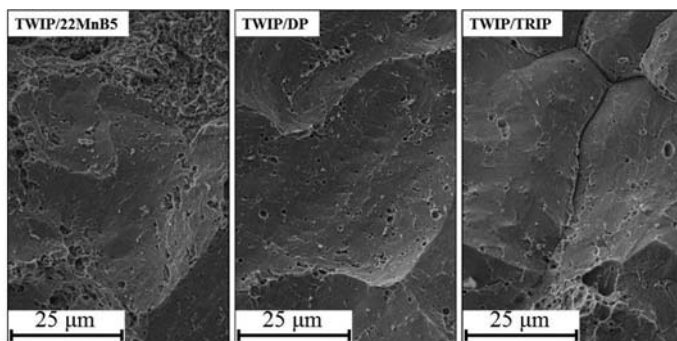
Fracture surfaces of the TWIP/22MnB, TWIP/DP, and TWIP/TRIP joints. Fractures in the fusion zone of the weldments.
